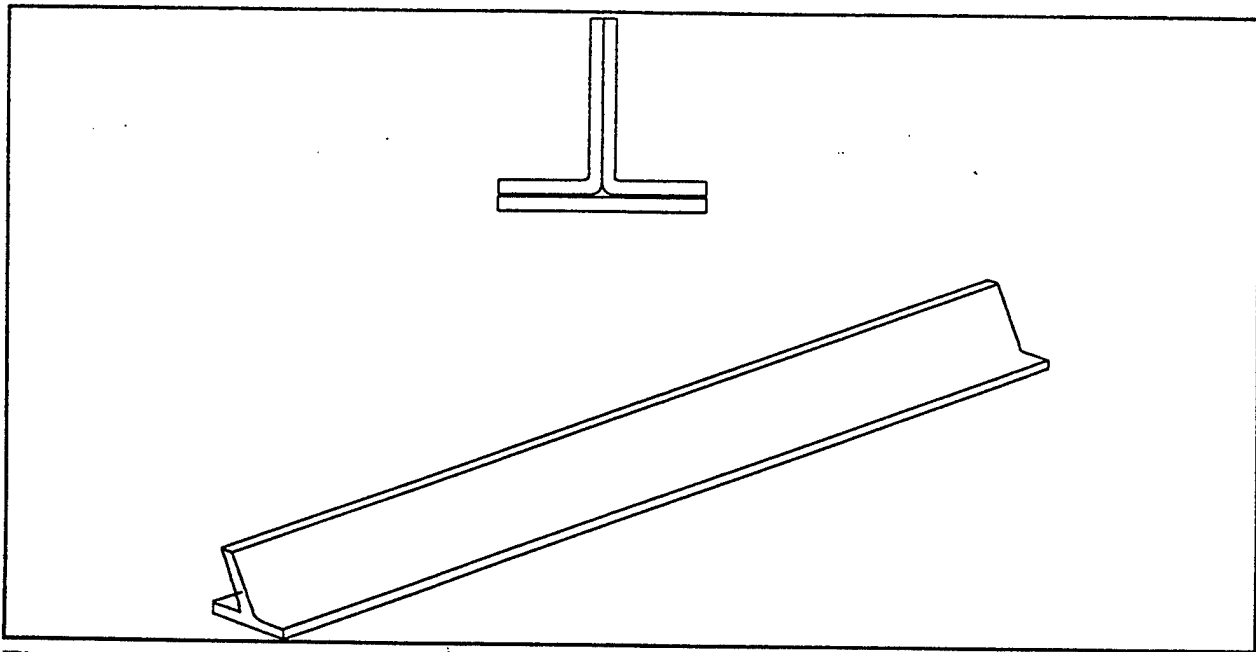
"T" - Composite Assembly (TCA) Composite Layup/Assembly - "T" Section
